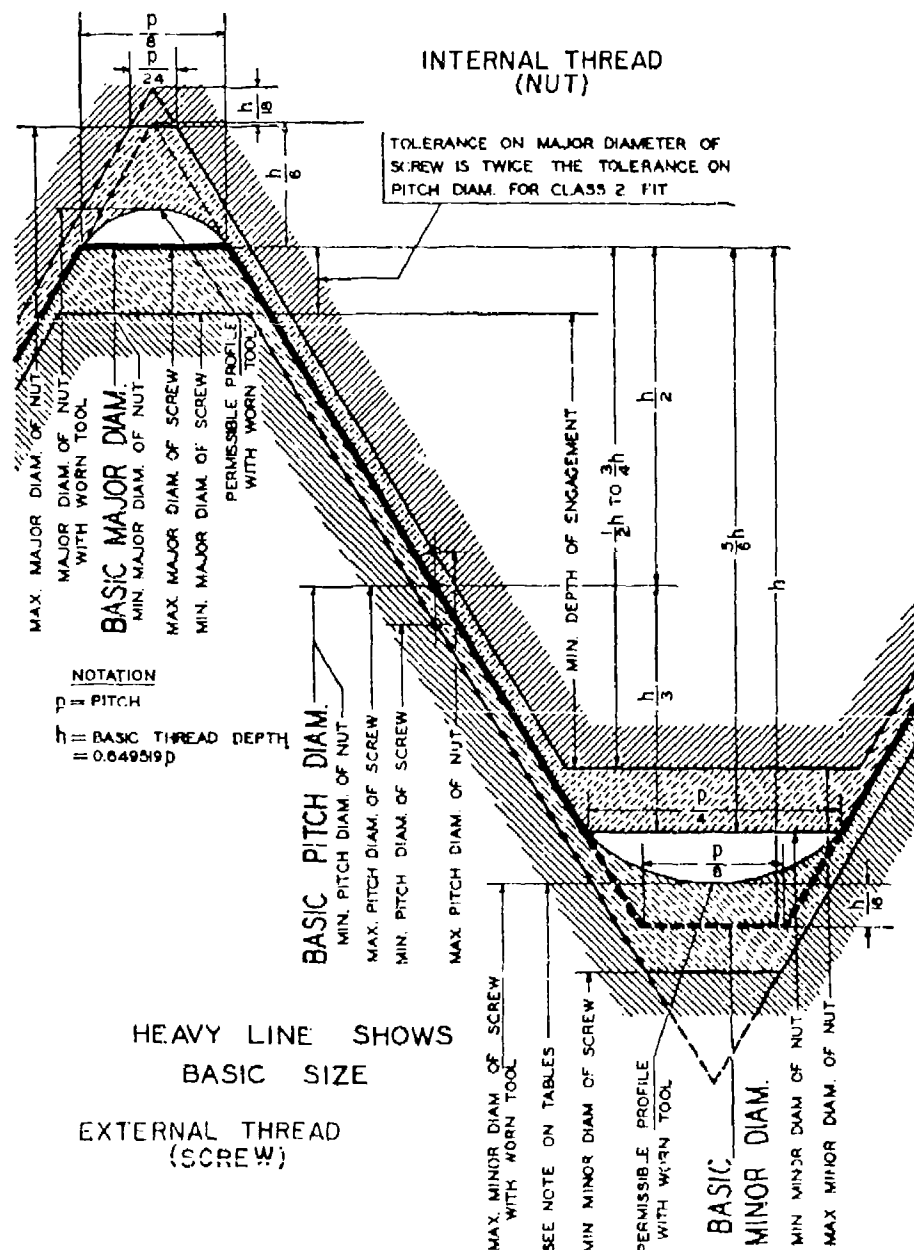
Disposition of tolerances and crest clearances for class 3.
